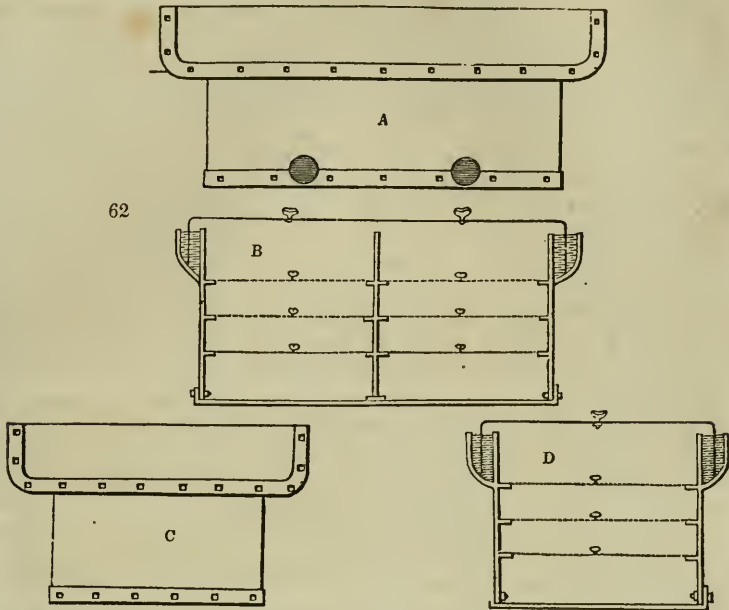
Elevations and sections of dry-lime purifiers; A, longitudinal elevation; B, ditto section; C, transverse elevation; D, ditto section.
